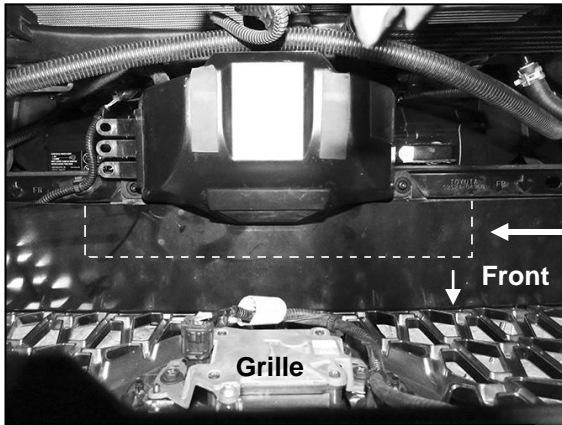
Attach driver/left side of Bumper to outside of Bracket Winch Tray assembly
